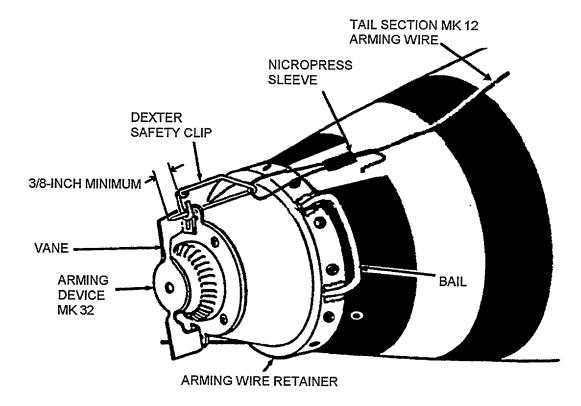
E. Details of Tail Section Mk 12 Arming Device Arming Wire Rigging for F/A-18 and P-3 Aircraft
